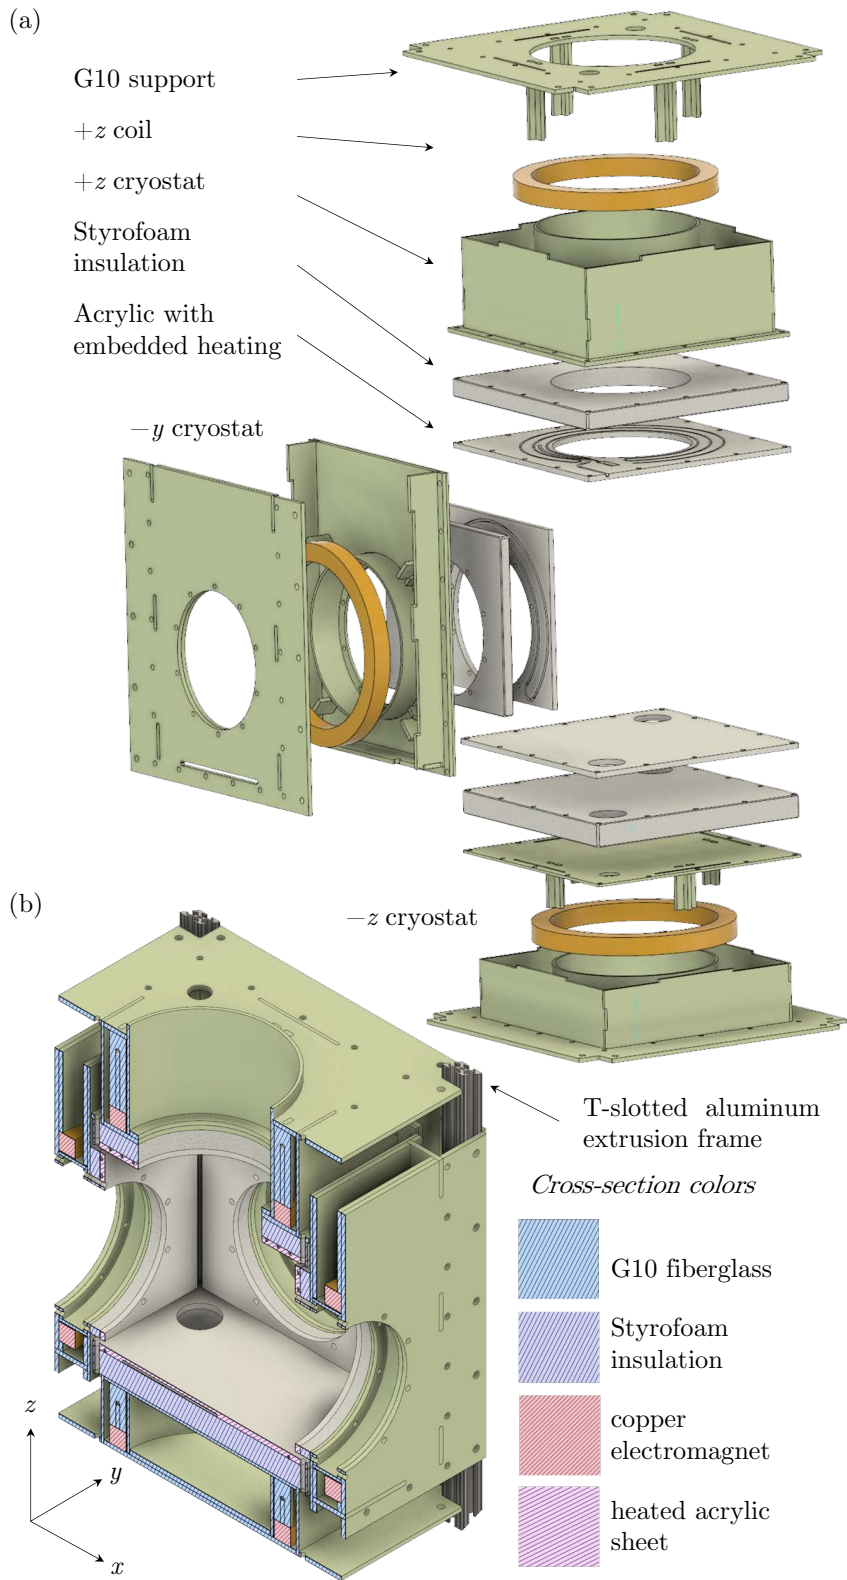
CAD model of the magnetic manipulator: (a) exploded view of three cryostats, (b) cross-section view.
